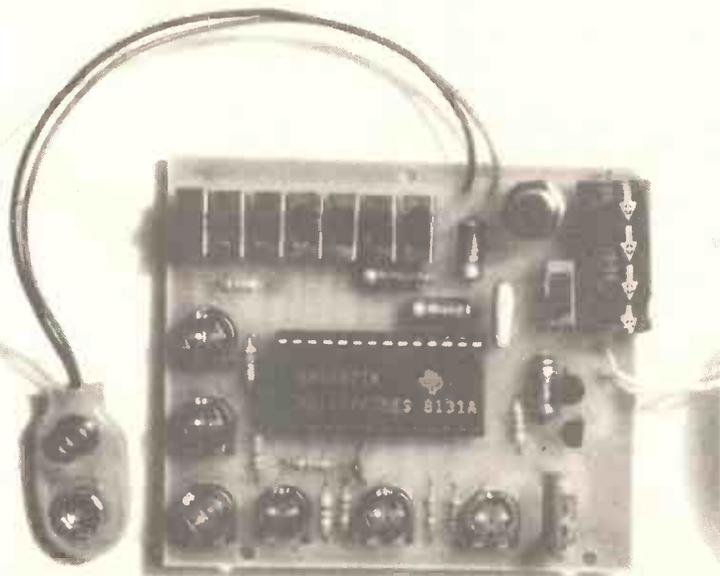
Component layout and full size printed circuit copper foil master pattern. The completed sound generator (less speaker) is shown in the photo below. It is advisable to use an i.c. holder to mount the i.c. on the board.
